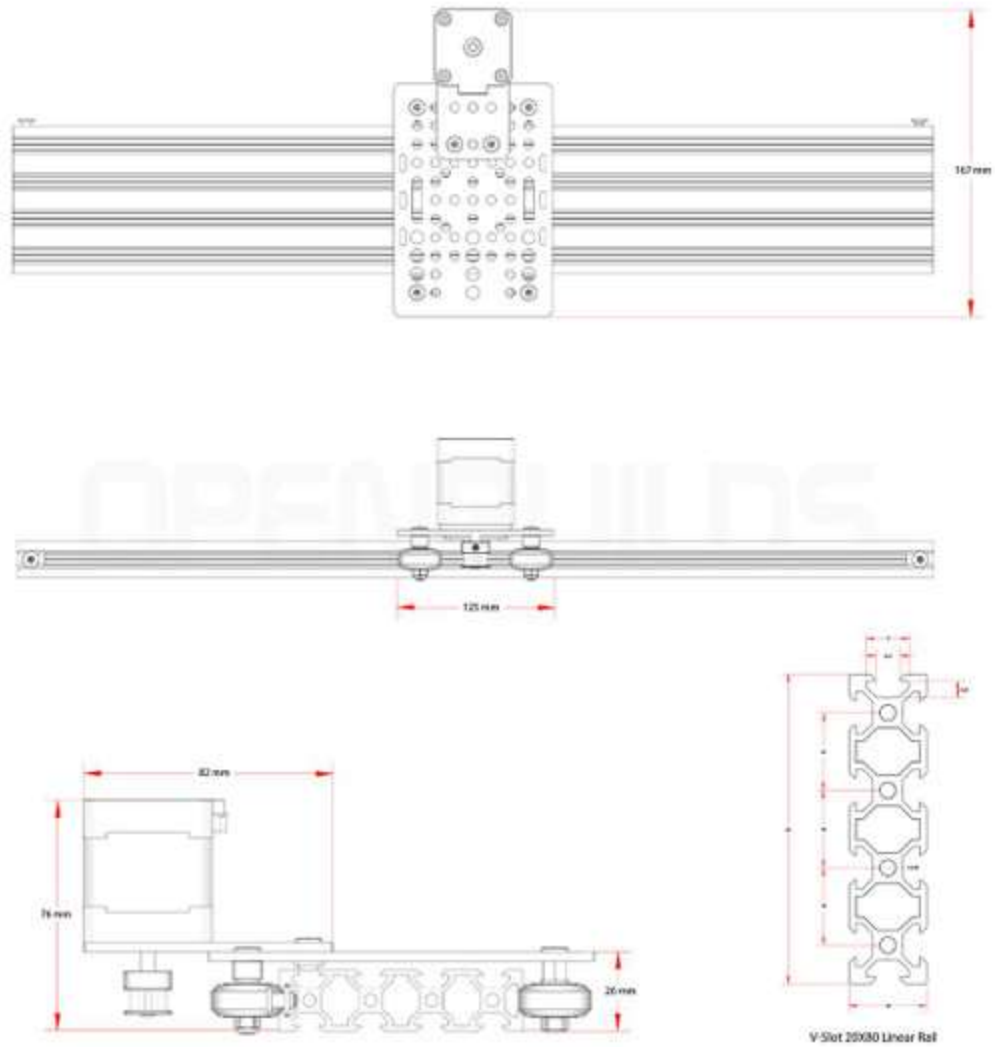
Manufacturing Drawing of part SS#2-P#11- Linear Actuator Assembly
